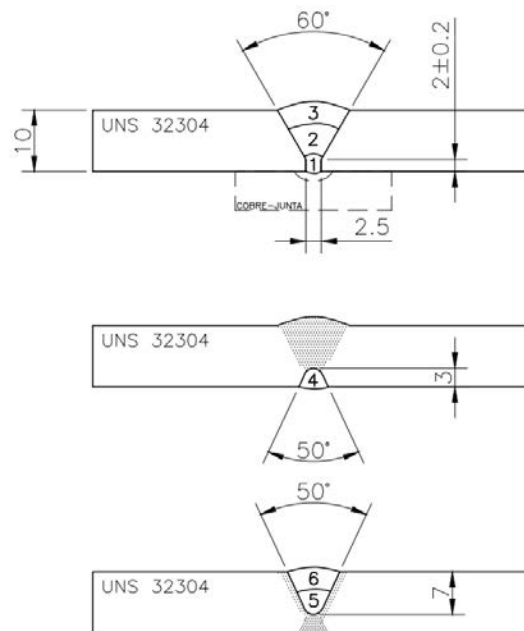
Dimensions of the welded specimens. Three passes in the primary welding: (1) root pass; (2) filling; (3) finishing; (4) root repair; joint repair: (5) filling; (6) finishing.
